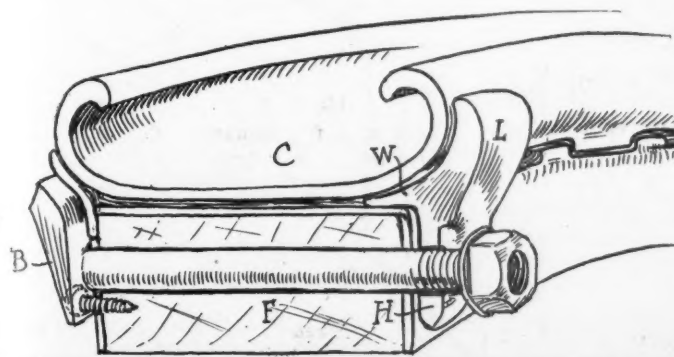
MICHELIN DEMOUNTABLE: W, WEDGE ON CLAMP L; C, RIM; F, FELLOE; B, BOLT HEAD
